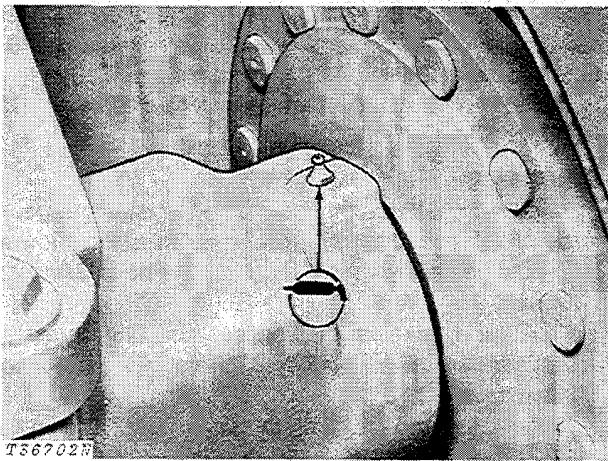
Axle Bearing Grease Fitting (Front Shown) (4 Points)
